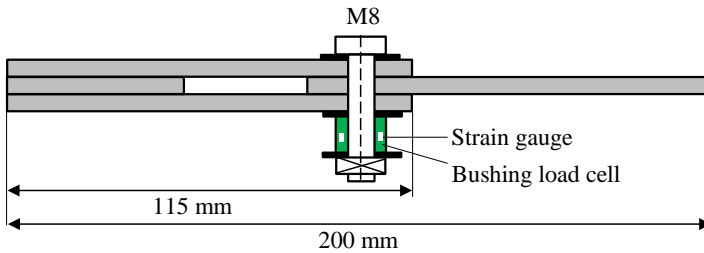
Geometry and assembly view of the DBLJ specimen.
